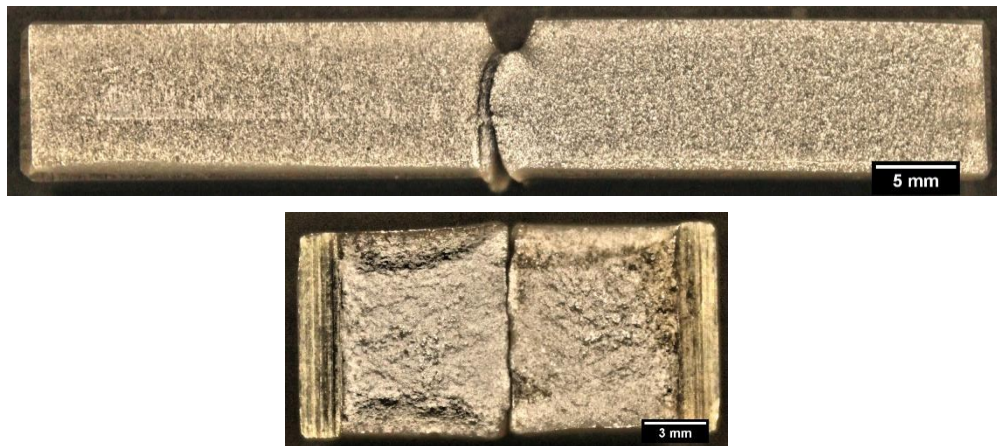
Fractured Charpy sample of 6061 aluminum
